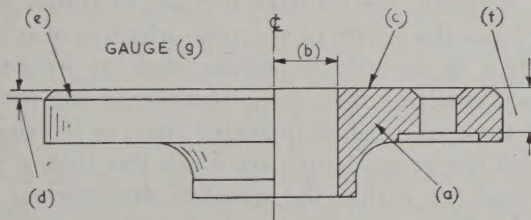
Typical parameters requested on a drawing; (a) material, (b) toleranced dimensions, (c) surface texture, (d) flatness and squareness, (e) chamfers on mating face, (f) spot facing, and (g) use of inspection gauges.
